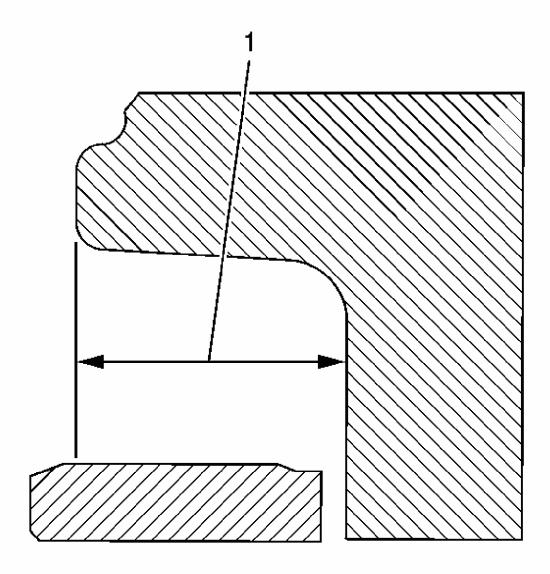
Installing Crankshaft Rear Oil Seal Courtesy of GENERAL MOTORS CORP.
